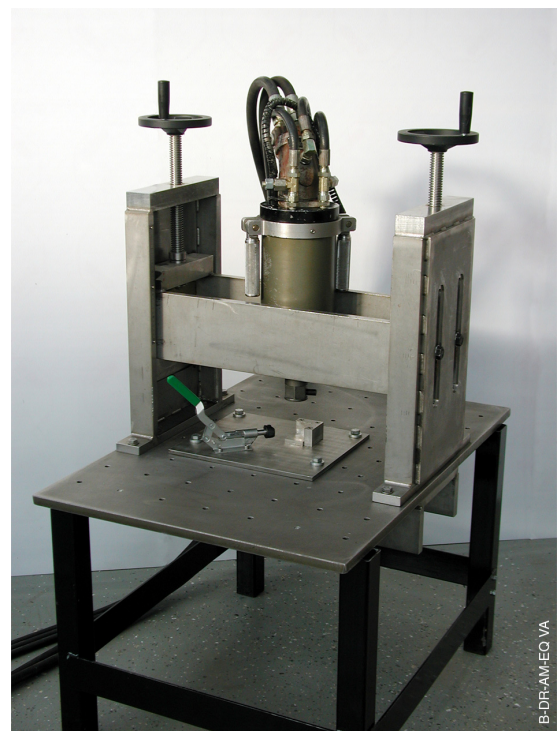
New welding table with quick tensioner fixture.
